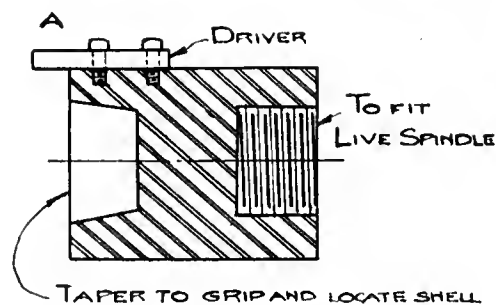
FACE-PLATE ON "C.M.C." ENGINE LATHE FOR FINISH TURNING.
